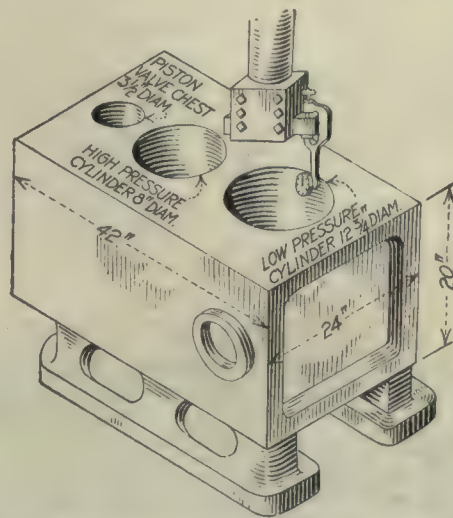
THE INDICATOR CLAMPED ON BORING TOOL
